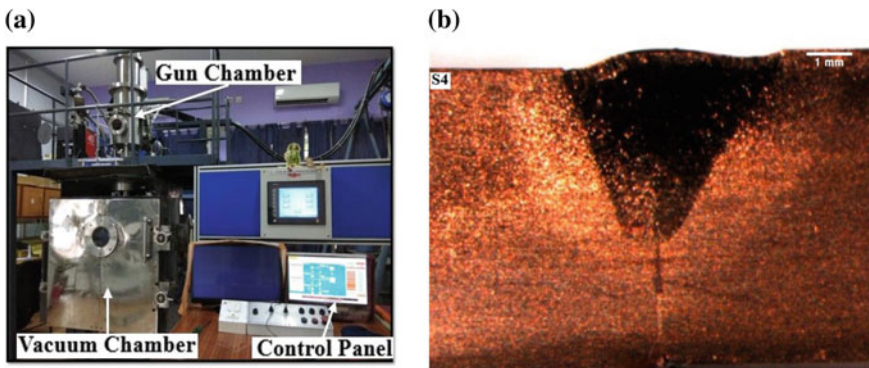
a Electron beam welding setup, b partial penetrated copper weld
